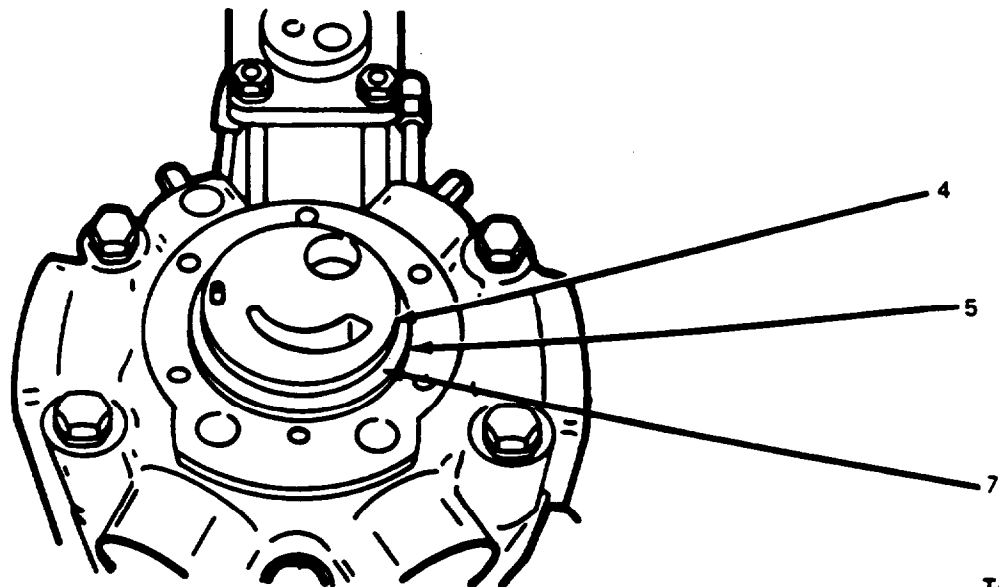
Charge Pump Eccentric Inner and Outer Rotor.
